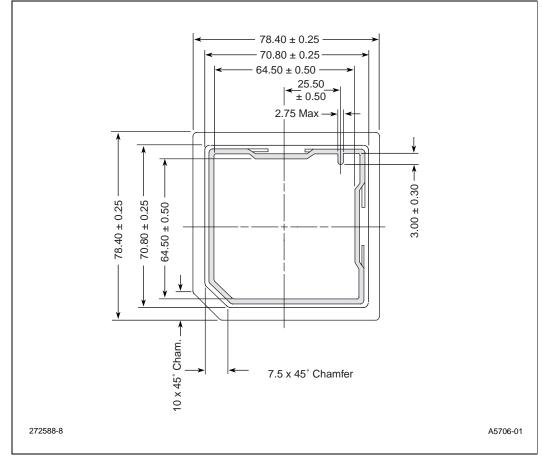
Coin Stack Tube (Cross-Section Detail)
